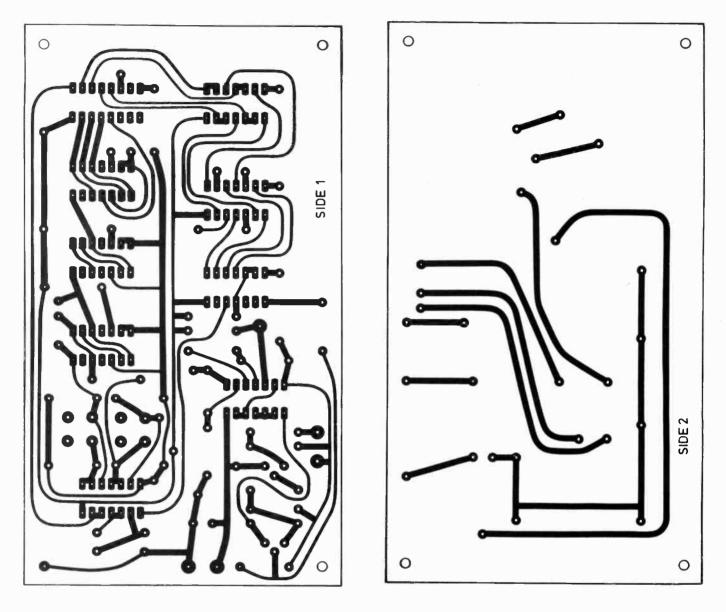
The double-sided PCB used in the prototype. Scale 1:1.
